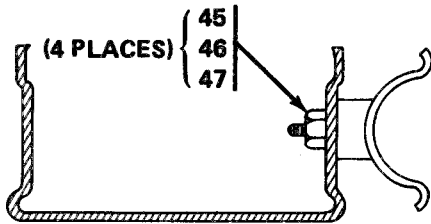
Electrical Equipment Shelter Utilities Raceway Installation (Sheet 4 of 6)
